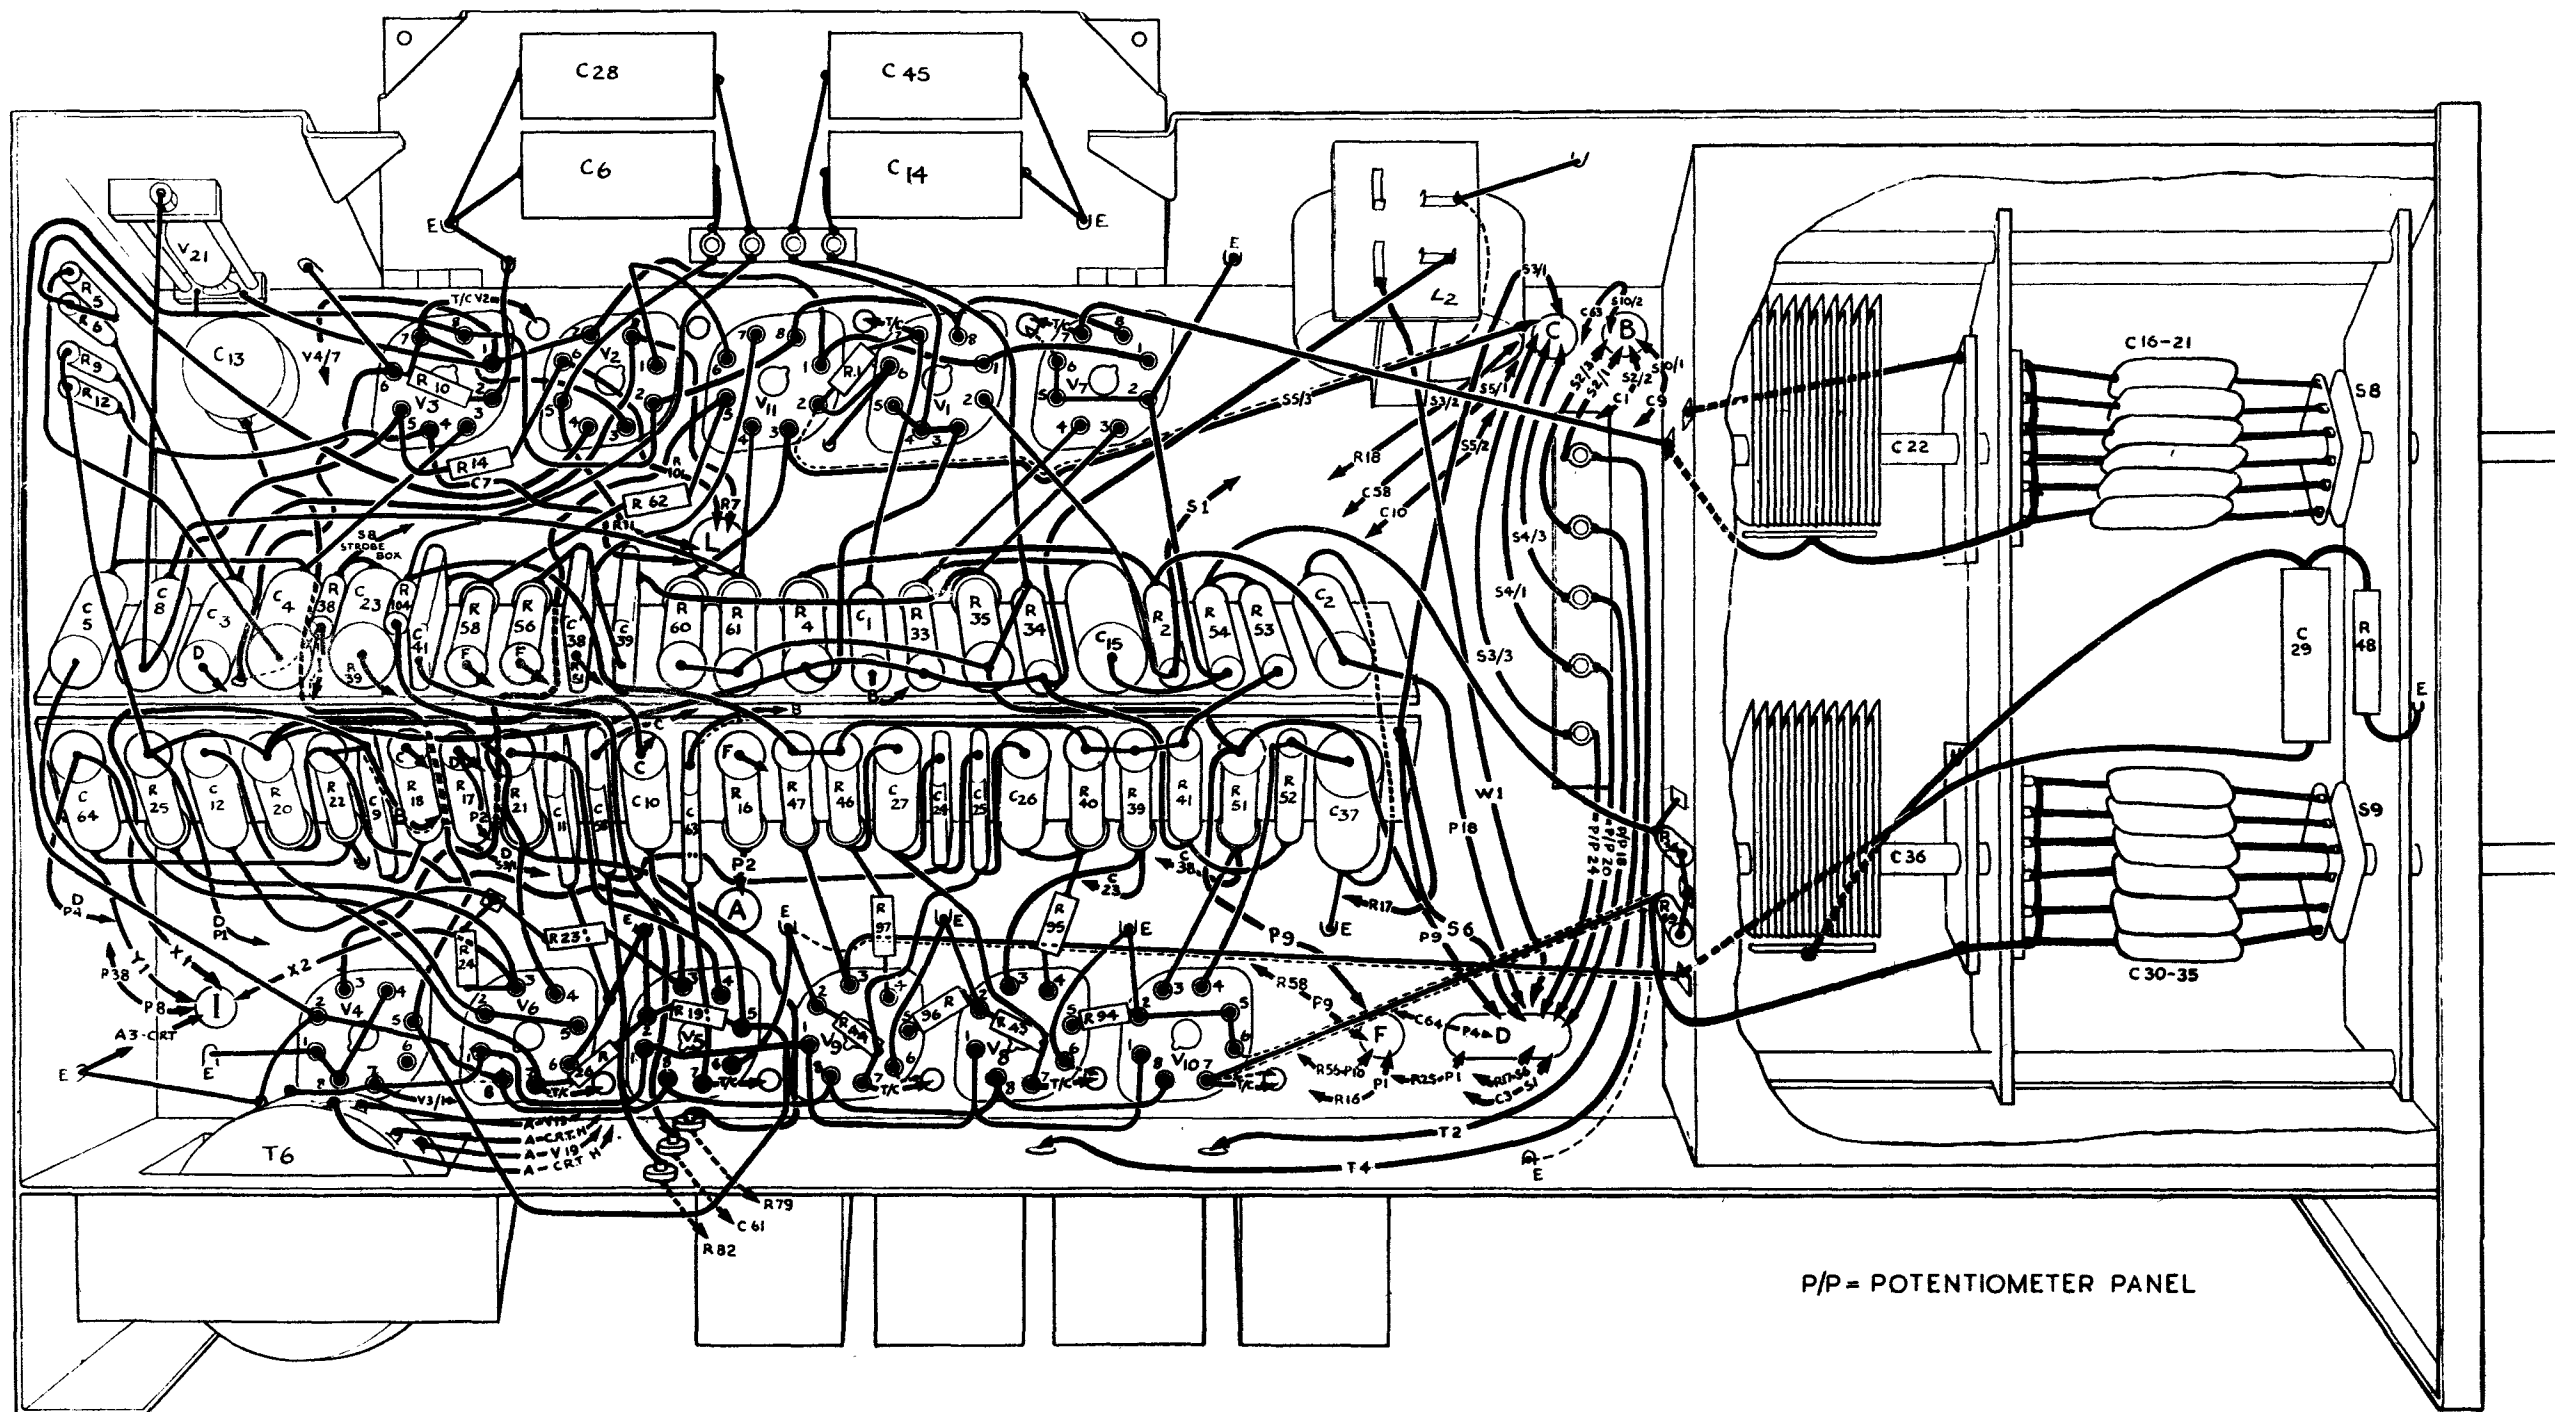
BENCH WIRING OF INDICATING UNIT TYPE 62-UNDERSIDE OF CHASSIS
